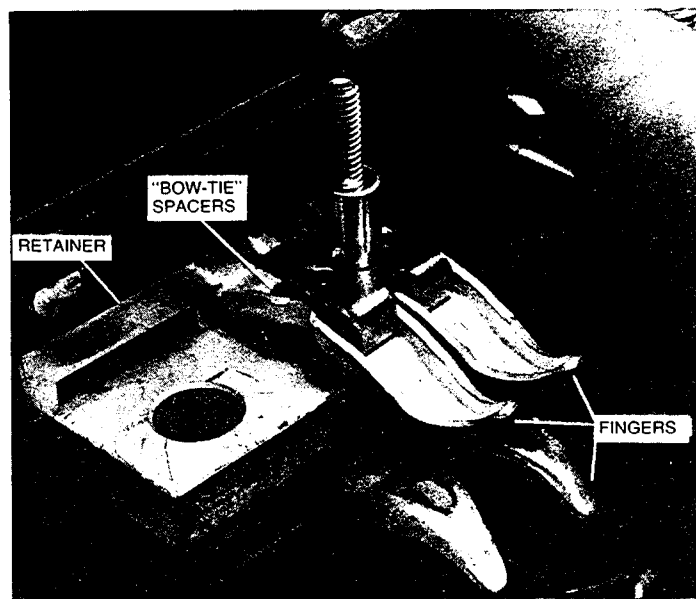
PARTIAL PRIMARY DISCONNECT ASM
